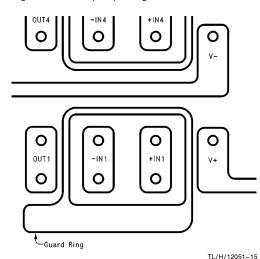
Example of Guard Ring in P.C. Board Layout
